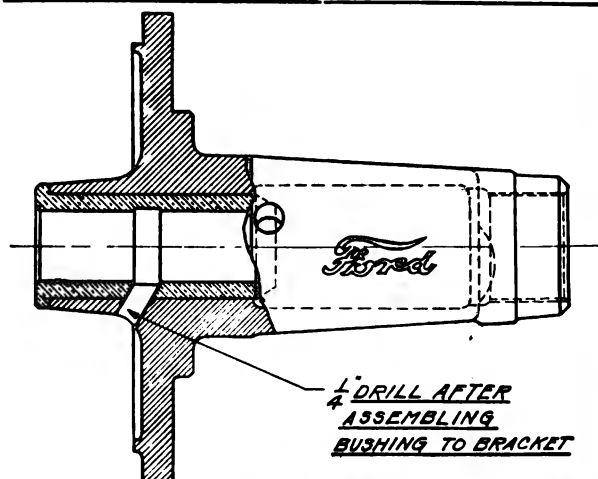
, Starter Mounting Bracket, Showing Location of Oil Drain Hole.
